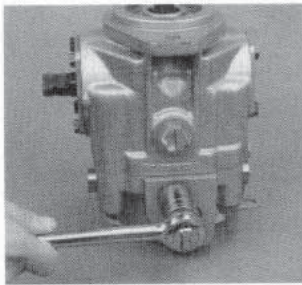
Remove Check and Relief Valve Plug (PV)
